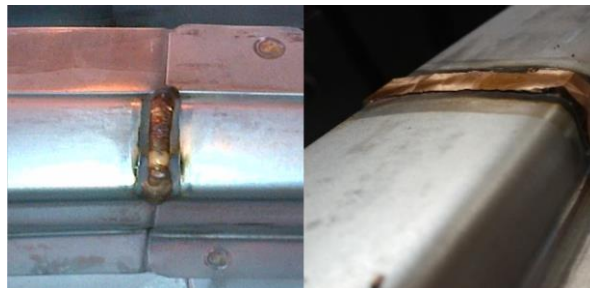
Welding beam. Left: Welding beam before smoothing. Right: Welding beam after smoothing.
